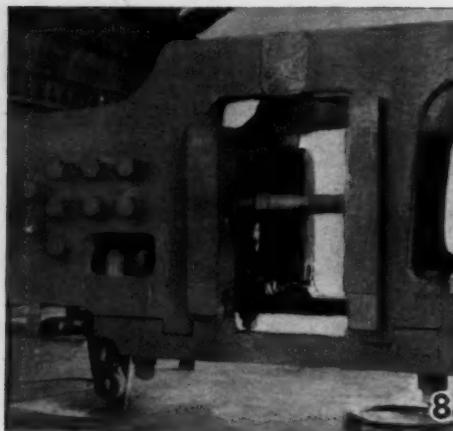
Frame after welding operation has been completed. Fig. 9—Close-up view of weld.
